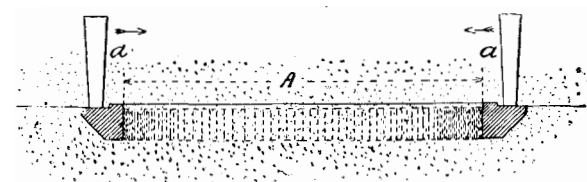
LARGE INGATES ON A STEEL CASTING HINDER SHRINKAGE.
